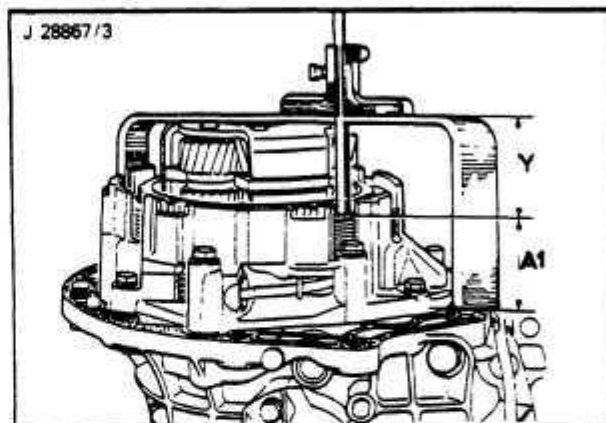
BRAKE B-2 OPERATING CLEARANCE
